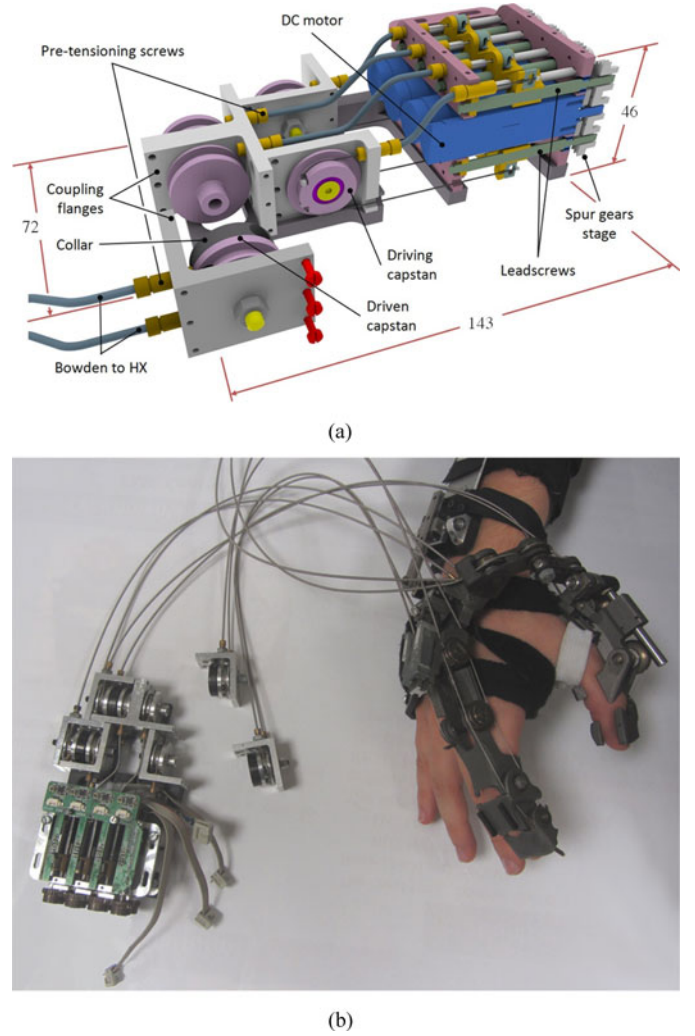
Remote actuation unit and removable capstan system, [34]. (a) CAD with encumbrances and cross-section view of a single actuation line. (b) Real actuator (left), detachable pulleys (center) and tethered worn HX (right).
